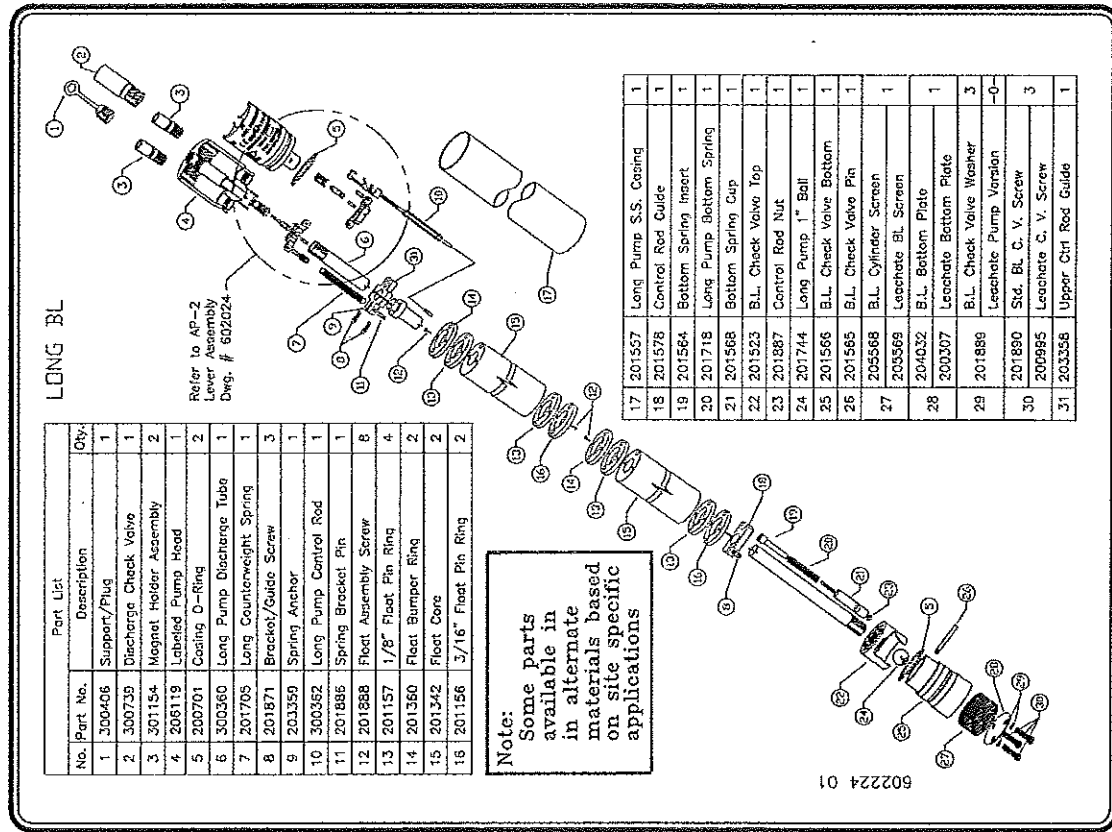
Exploded View of a Long Bottom-Loading Autopump AP-2
